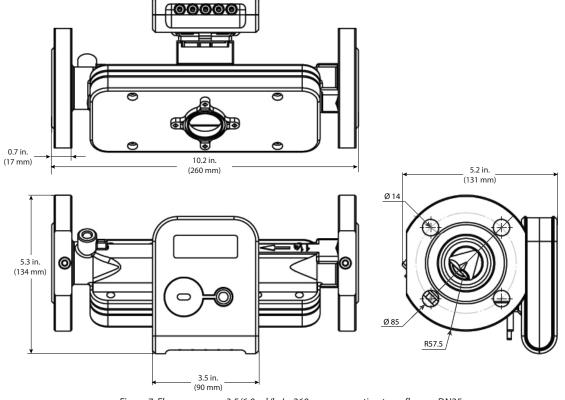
Flow sensor $q_p = 3.5/6.0 \text{ m}^3/h$; L=260 mm; connection type: flanges DN25
